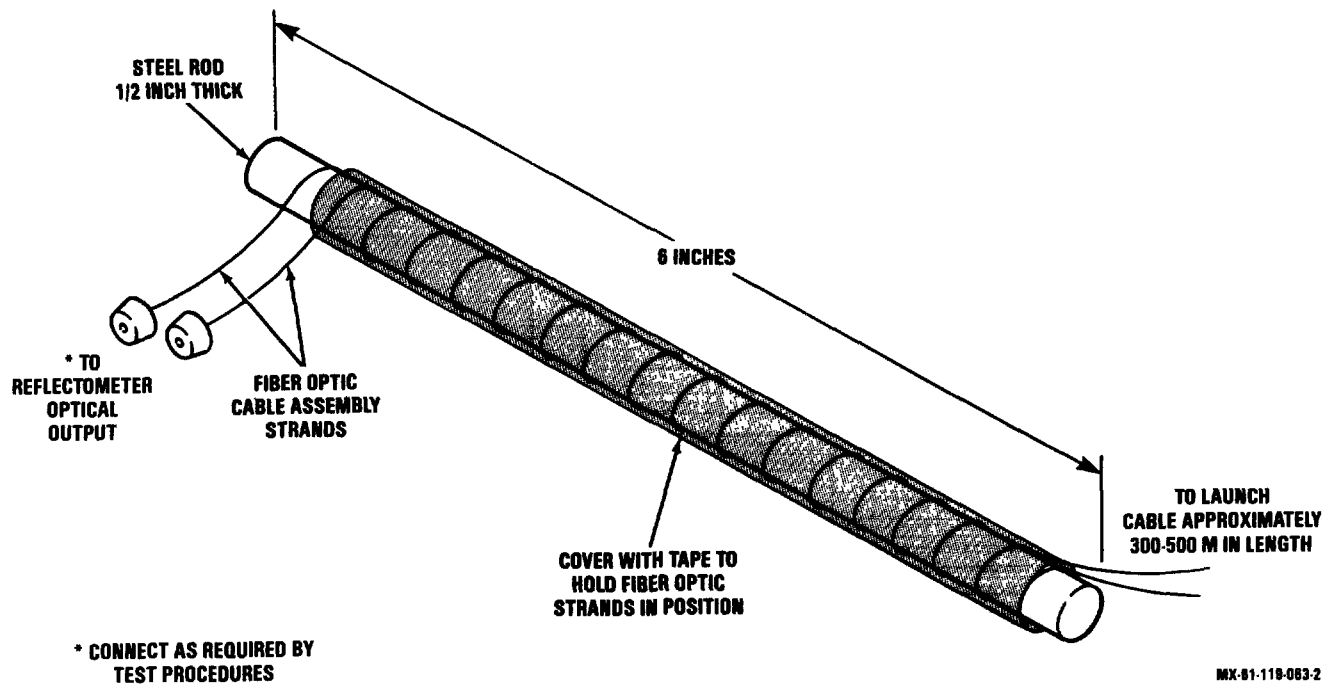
Fiber Optic Cable Assembly 1A8 or 1A9 Bench Test Setup
